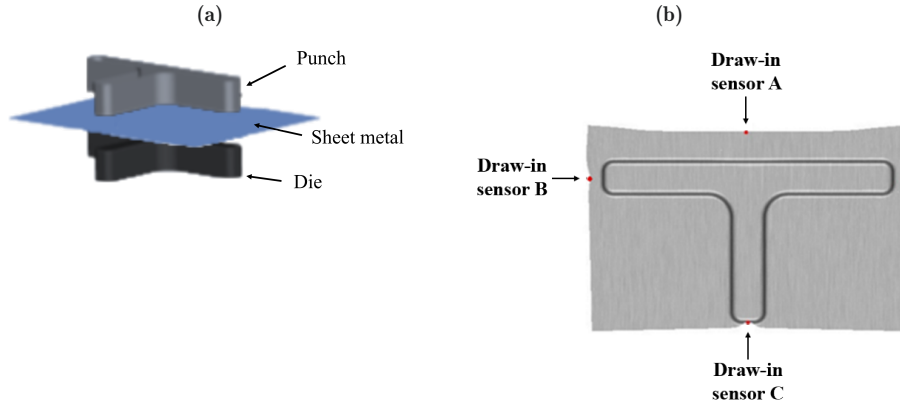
“T-shape” steel component: deep drawing mould (a) and mechanical scheme indicating the critical points A, B, and C (b).
